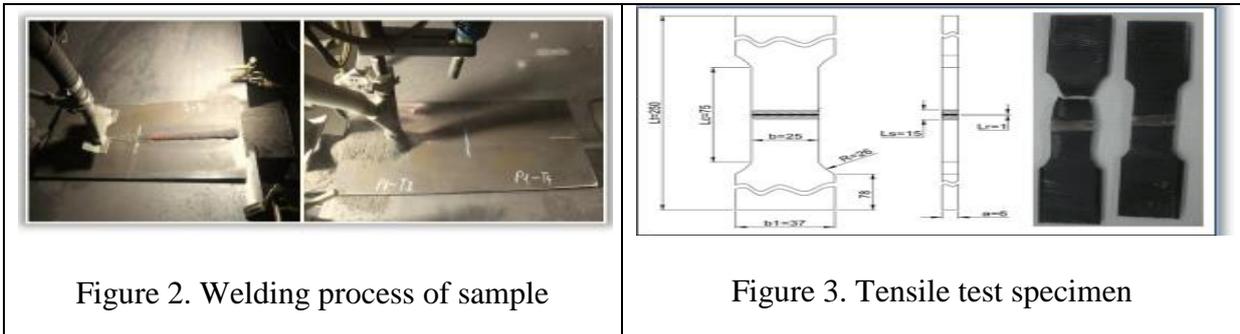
presents the schematic representation of the specimen geometry and dimensions used for tensile testing, along with images of a typical specimen before and after the tensile test.
